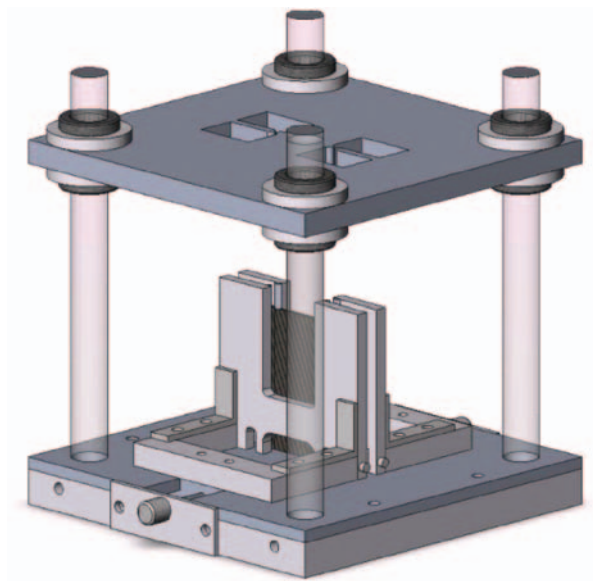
View of proposed fixture for flat specimens, showing 0-in. (0 mm) unsupported height.
